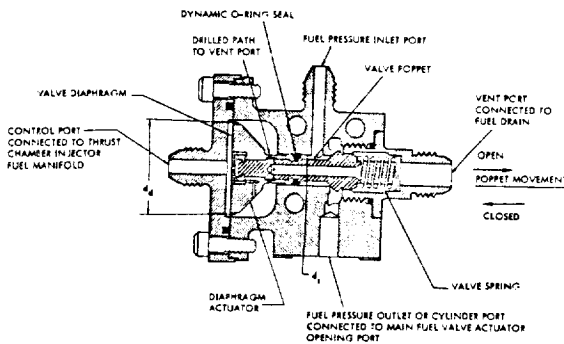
Typical fluid pressure actuated three-way pilot valve used as the ignition monitor valve in the A-1 stage engine.
